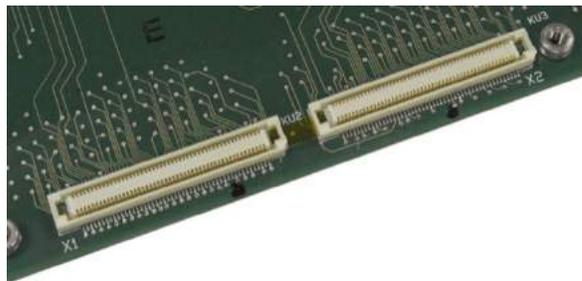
Close-Up View of ETX Connectors on Main PCB
